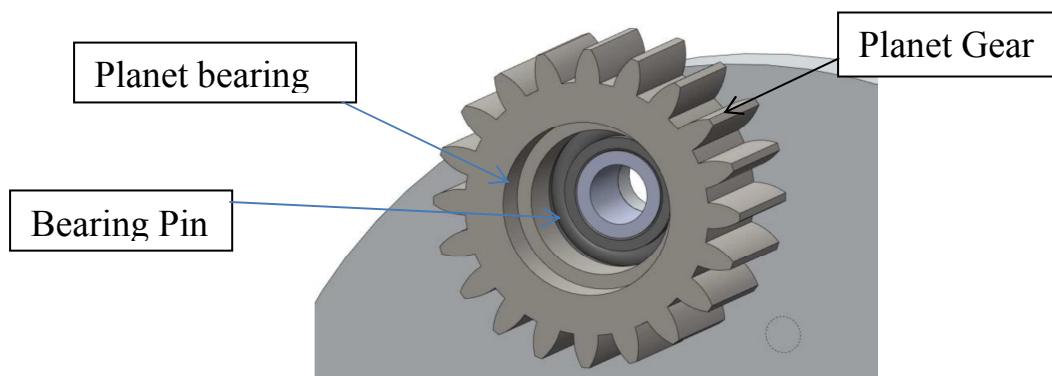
Bearing Pin, Planet Bearing and Planet Gear
